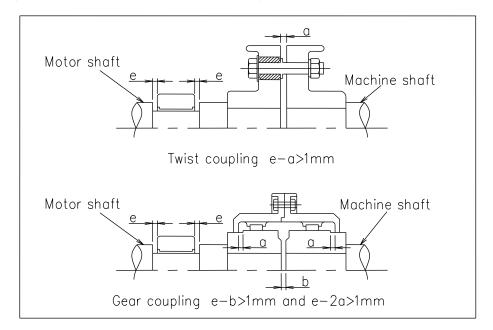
Relation between the end-play of the bearing and the flexible coupling
